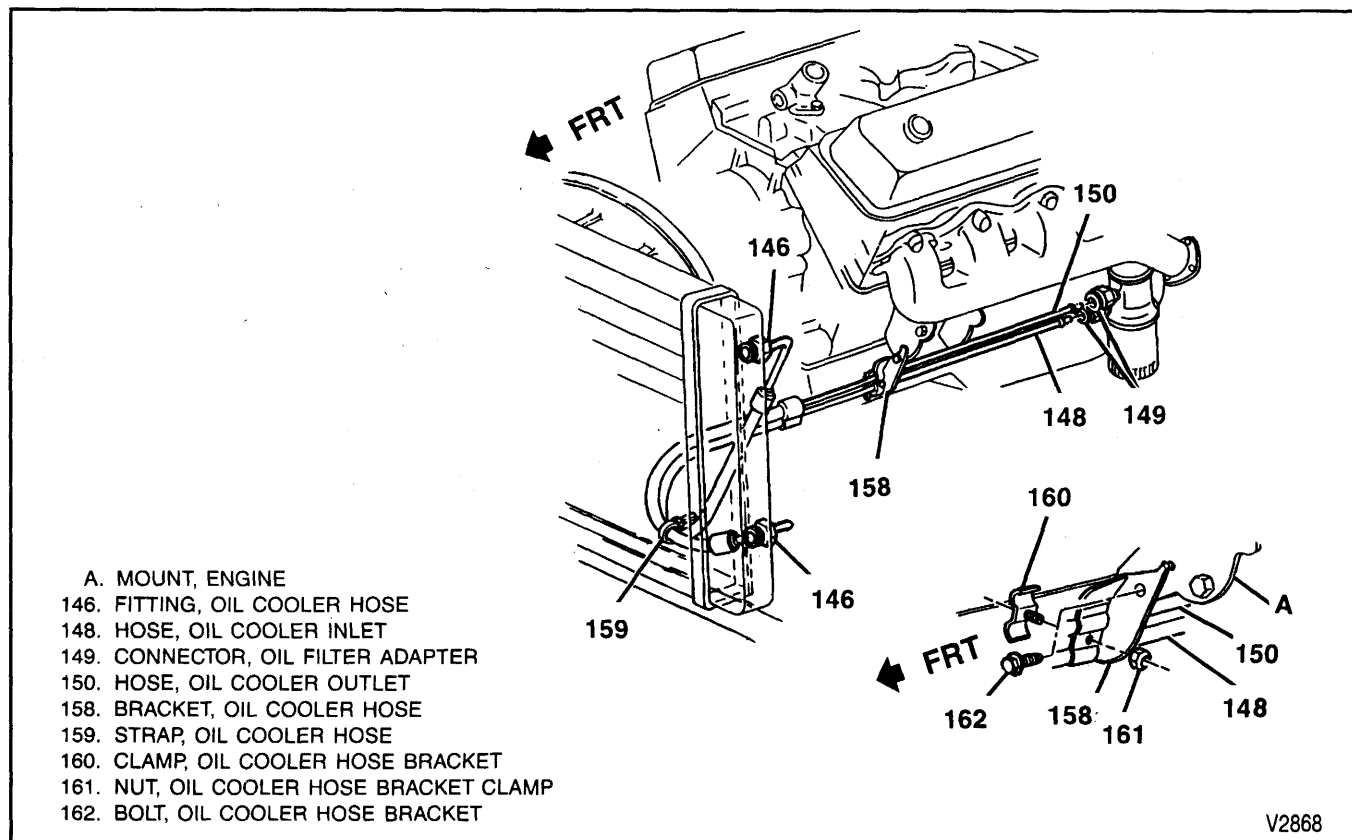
Engine Oil Cooler Lines and Components (5.0/5.7L Engines without H.D. Cooling)
